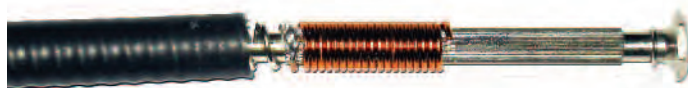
Additional wire soldered to end of helical and wound round a former.
